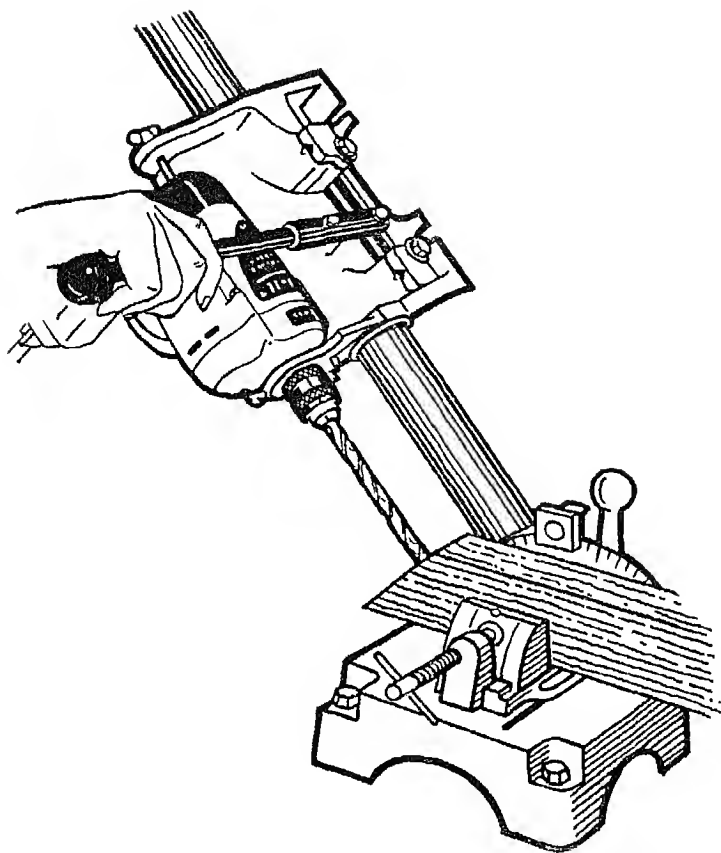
Drill bench clamp holding piece of wood for drilling with the Wolf Safetymaster.
